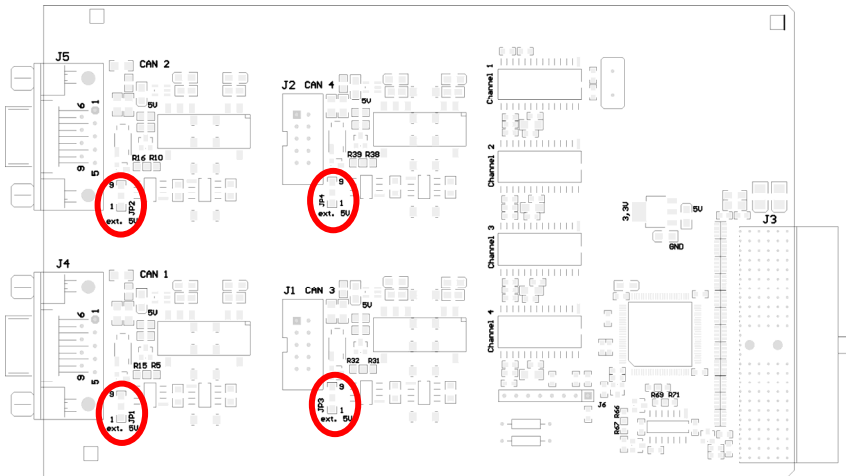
Positions of the solder fields on the PCAN-cPCI card
